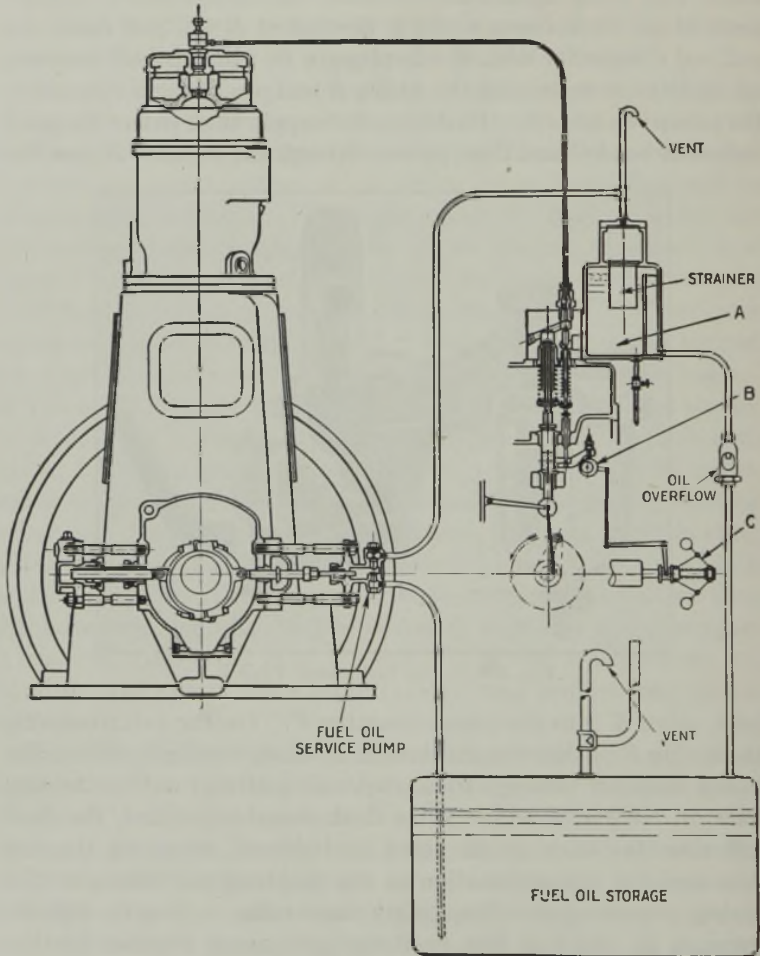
Diagram showing system of fuel distribution to a Worthington solid-injection Diesel engine.
